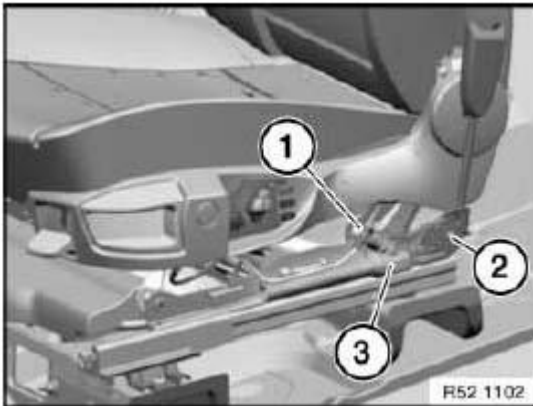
Identifying Plug Connection, Screw And Fitting Tensioner
